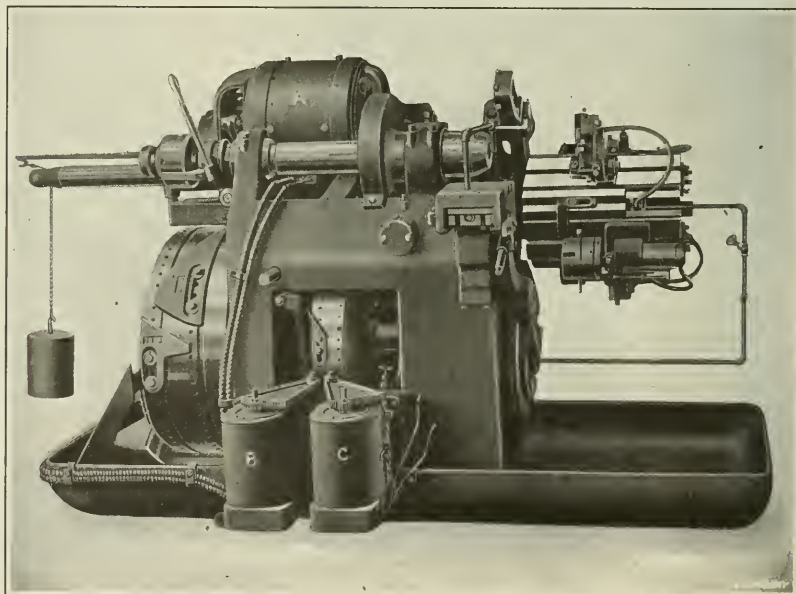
Gridley Single-spindle Automatic Turret Lathe equipped with Variable-speed Motor Drive
